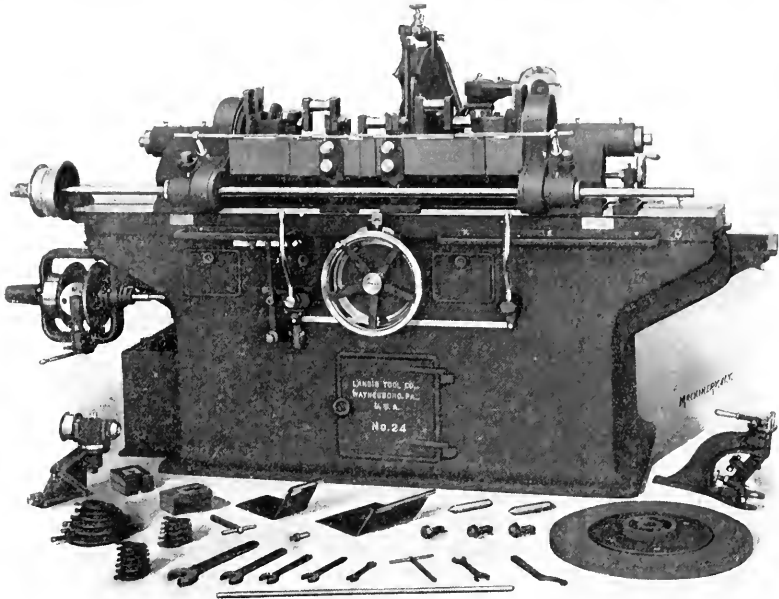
Landis Grinder arranged to Finish Automobile Crankshafts.
